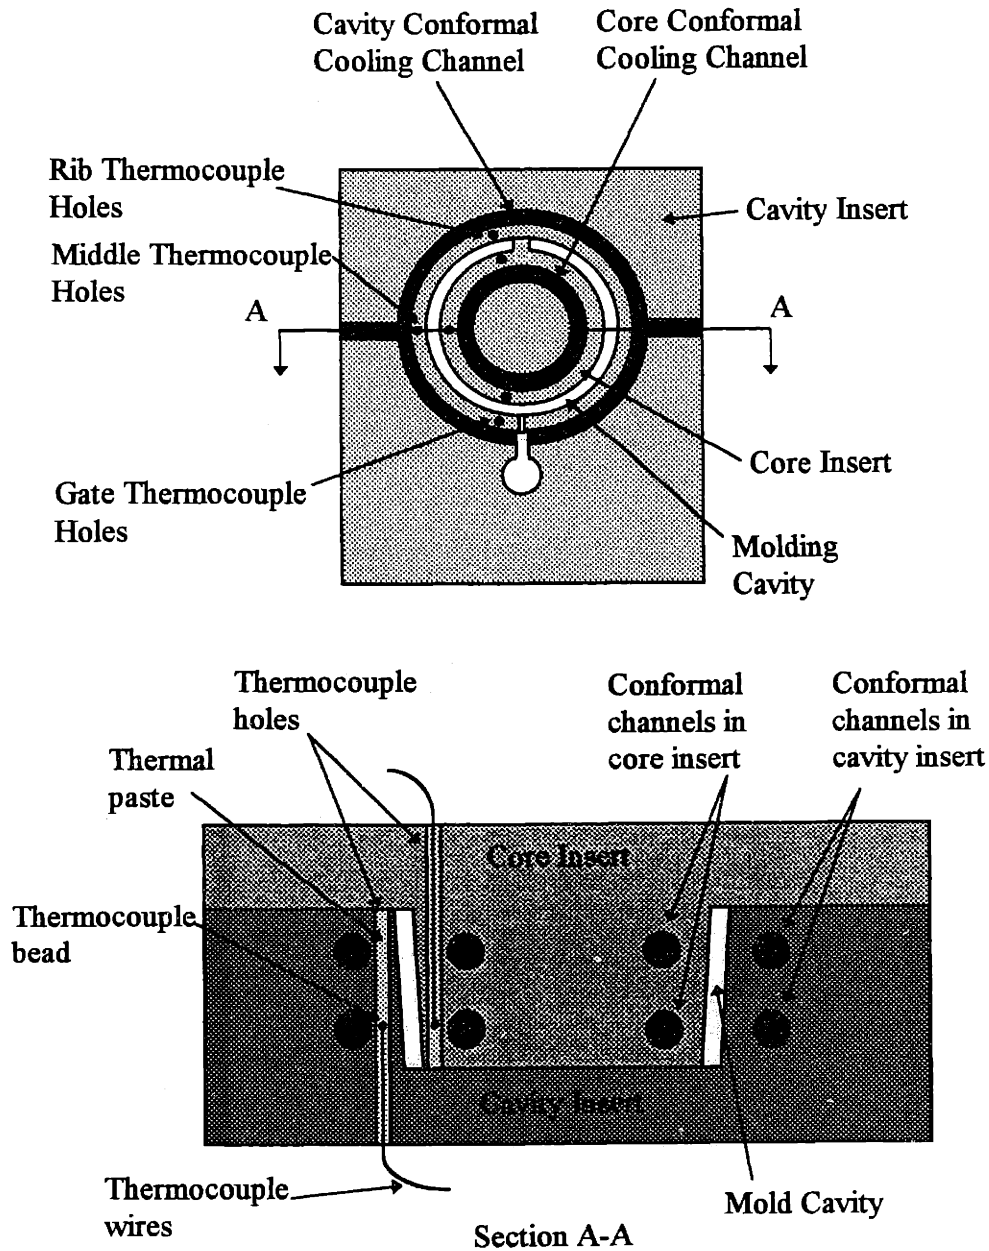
Thermocouple placement in cross sections of the core and cavity mold pair forming the mold cavity.
